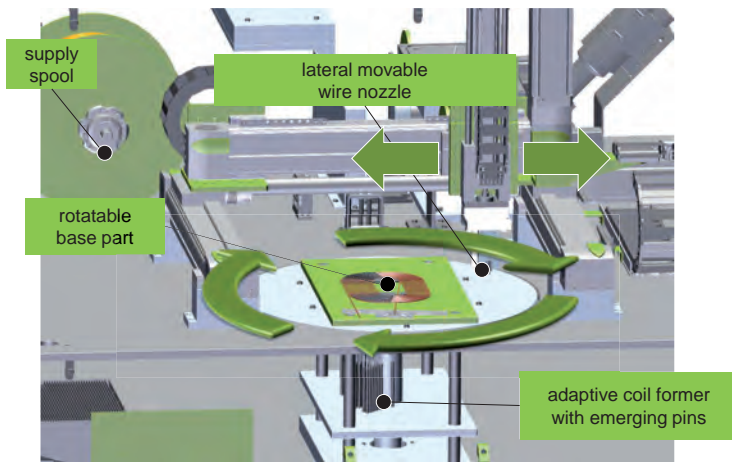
Kinematic concept with rotatable base part, adaptive coil former, and laterally movable wire nozzle.
